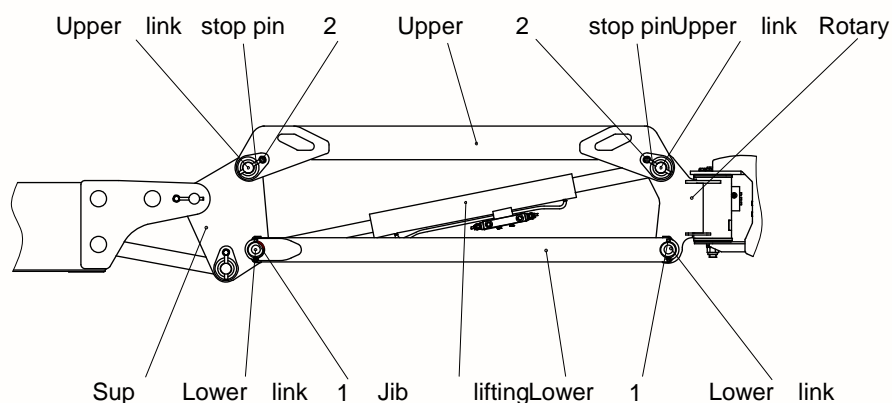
Rotary actuator and jib lifting cylinder disassembly diagram
